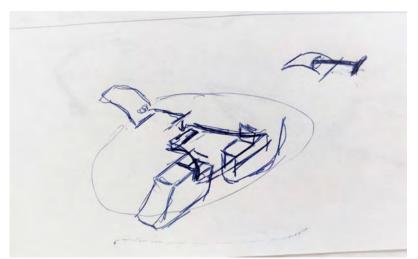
Sketch of Axe head concept. The axe head shape is working as a wedge when fastened via a mechanical clasp.
